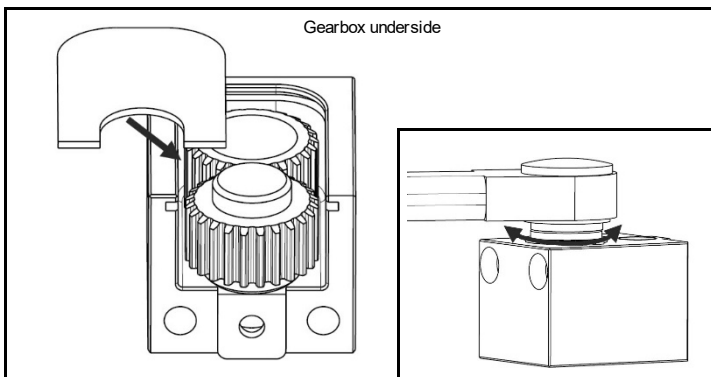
Fit gearbox cover, check gears run smoothly
